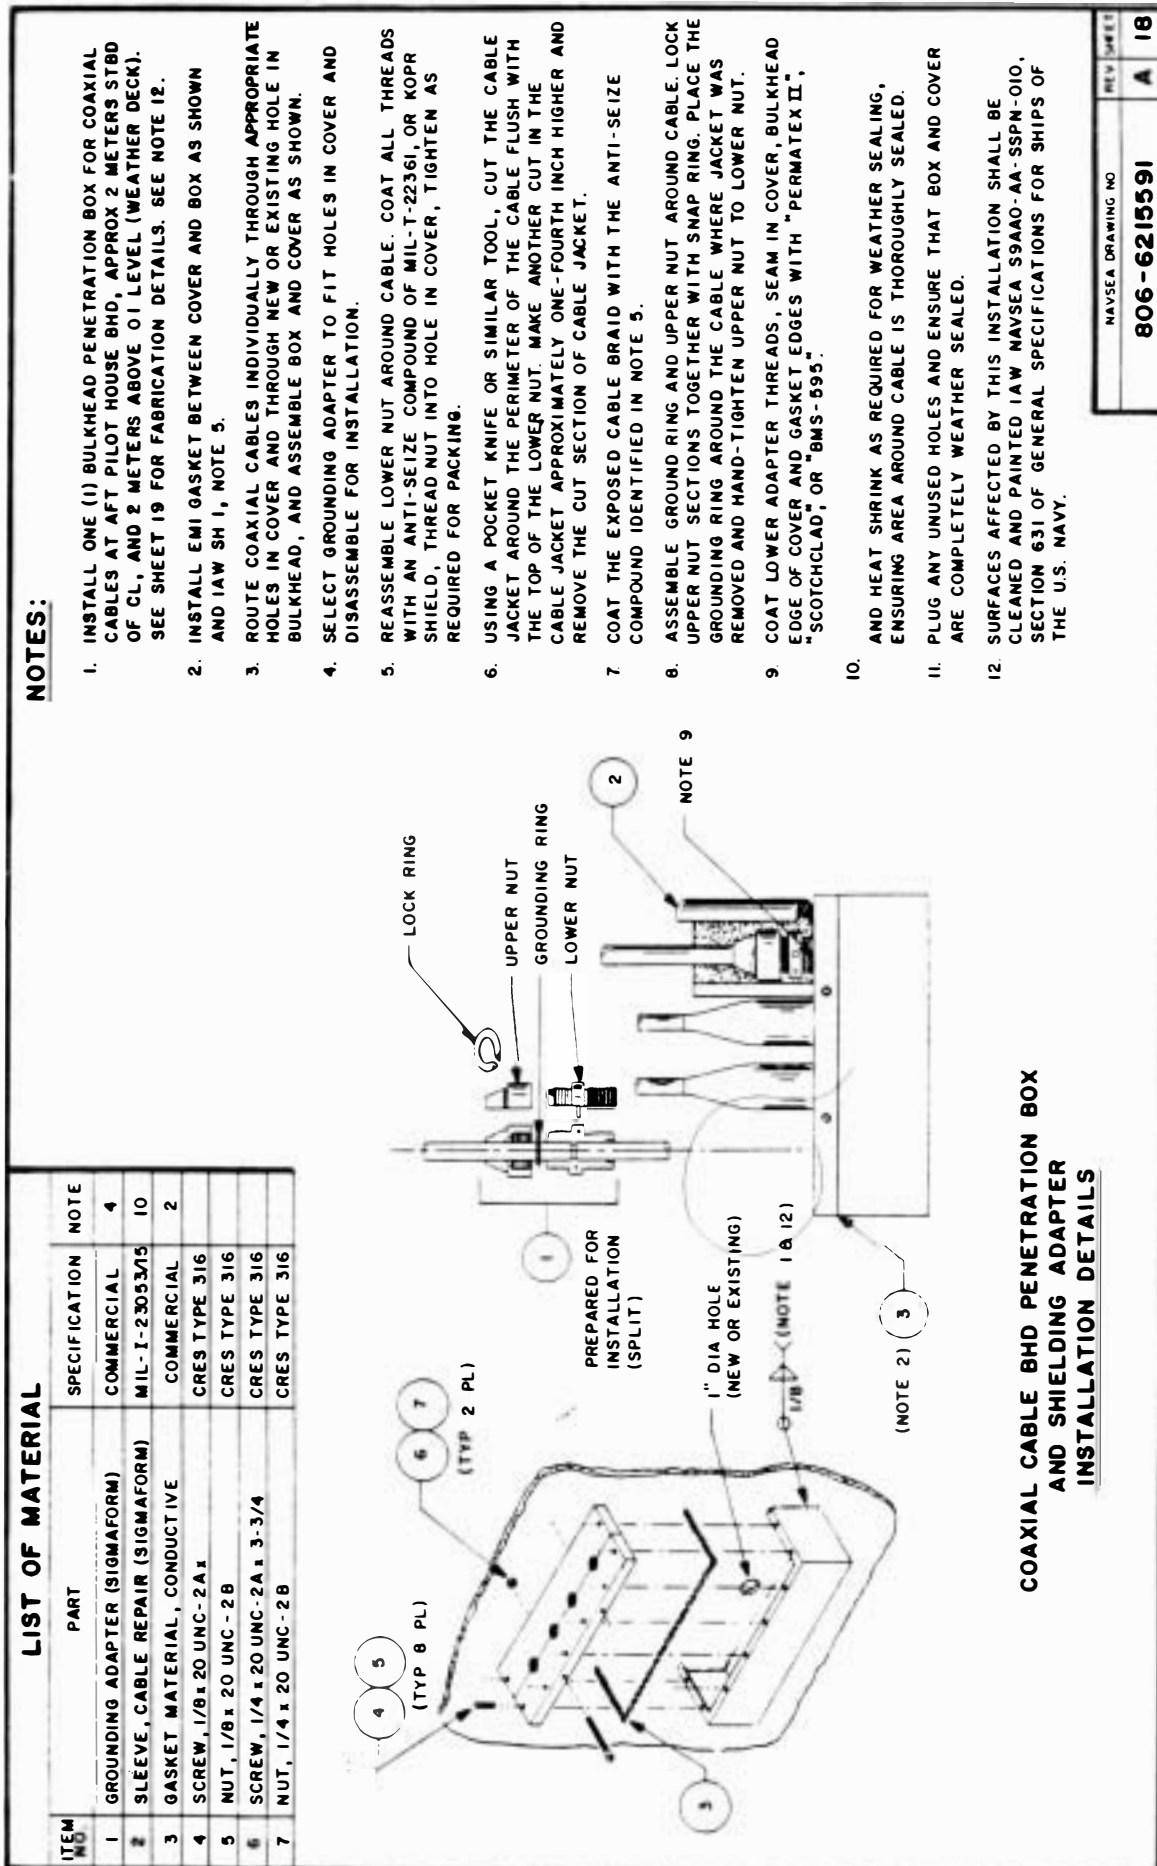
(b) Shipboard Cable Terminal Assembly Details
